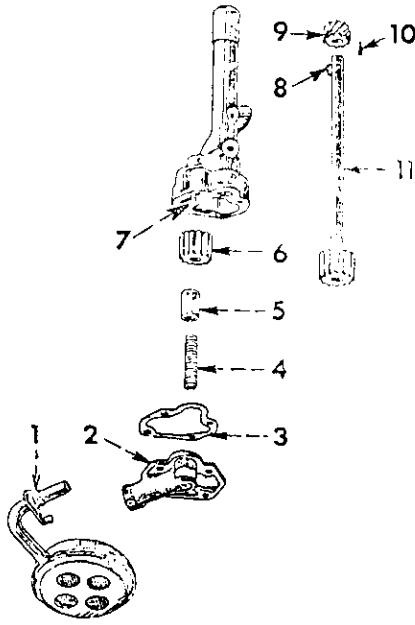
Exploded view of oil pump used in Series 424, 444, 2424 and 2444 non-diesel engines.
